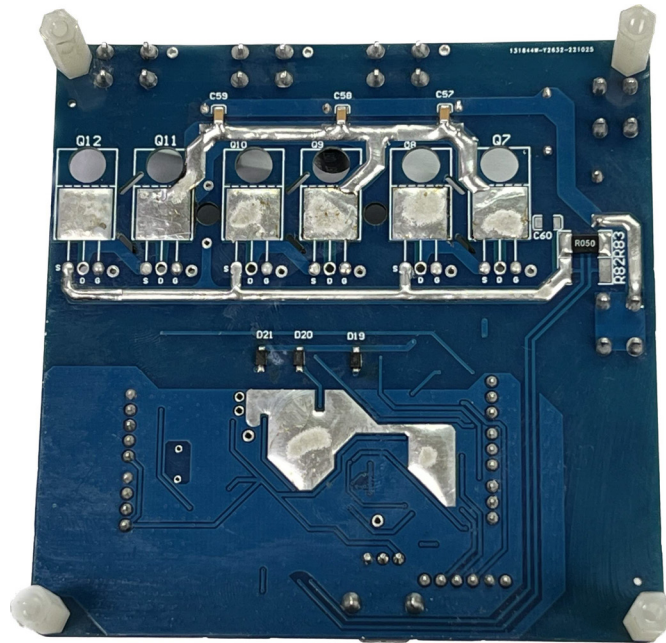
BLDC Motor Workshop HT32F65532G_BLDC_EVB Back View
